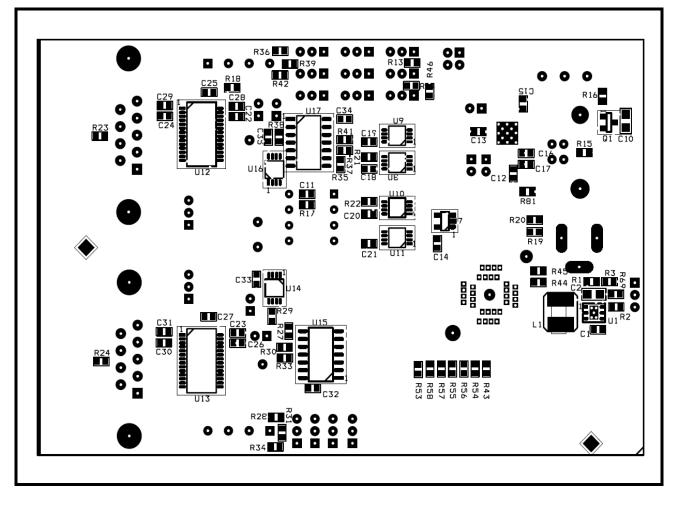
shows a bottom view of XR21V1412 evaluation board layout.
